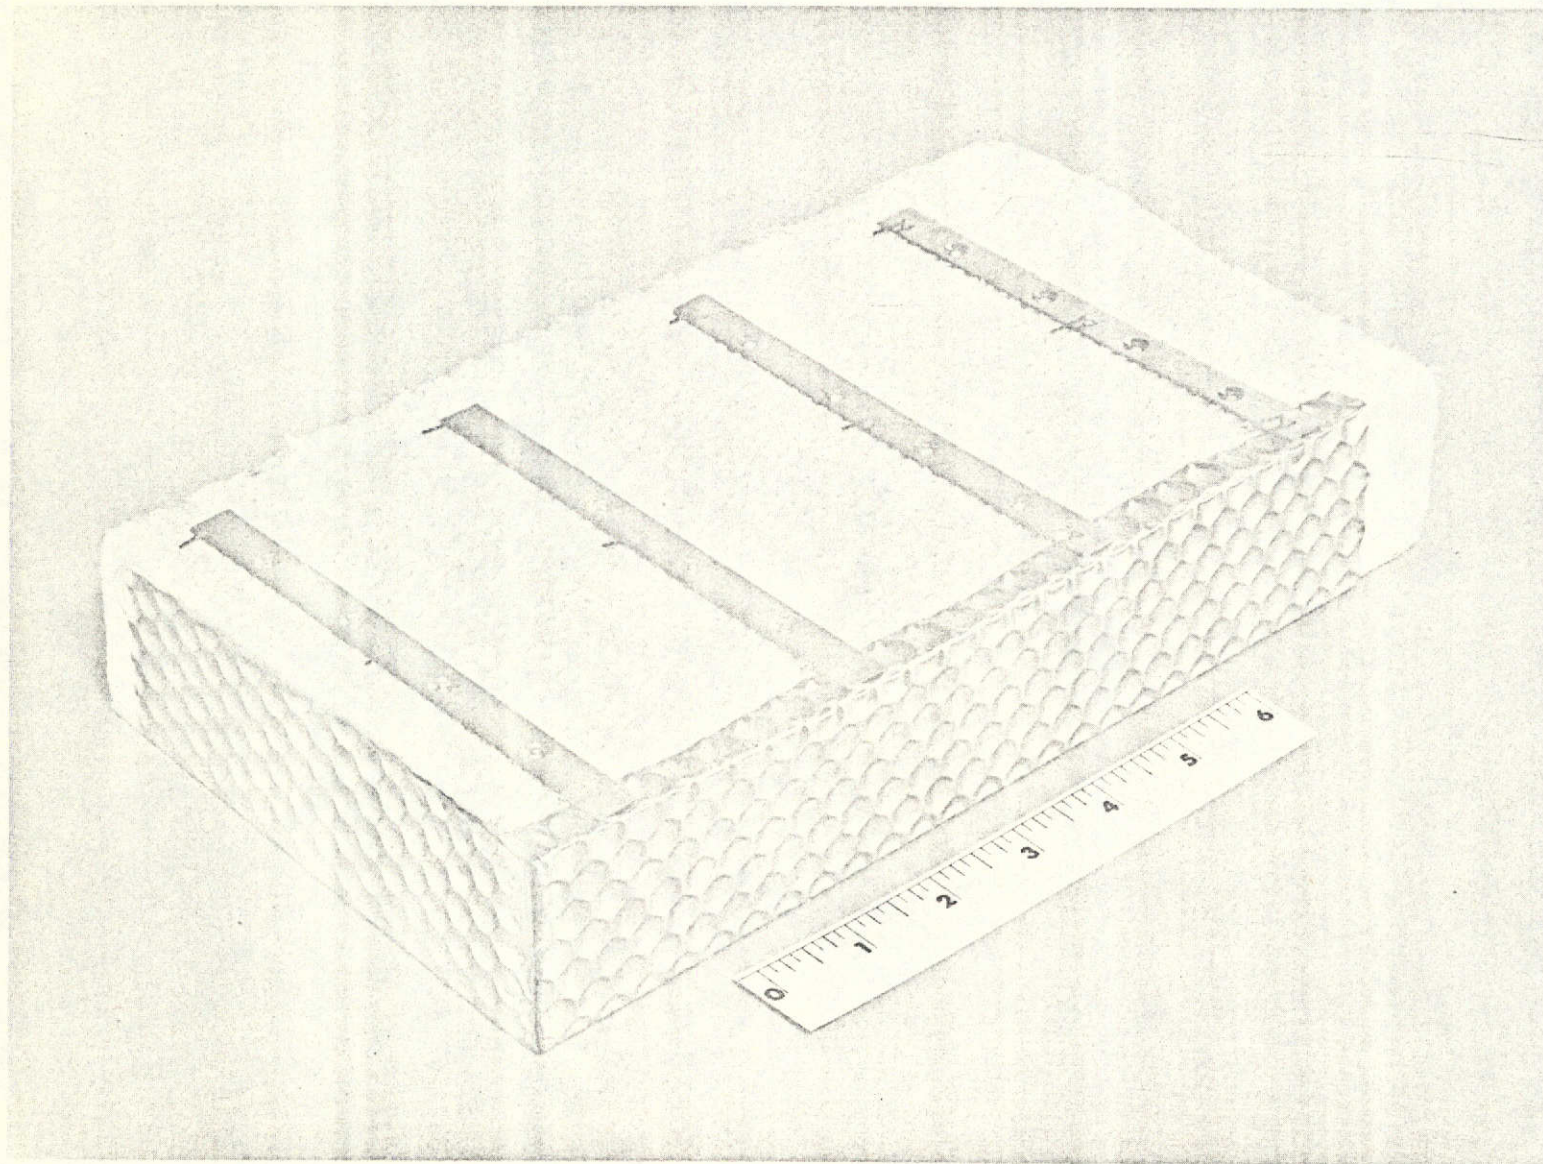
REAR OF FOIL ENCLOSURE ILLUSTRATING NUT STRIP FASTENER TECHNIQUE
